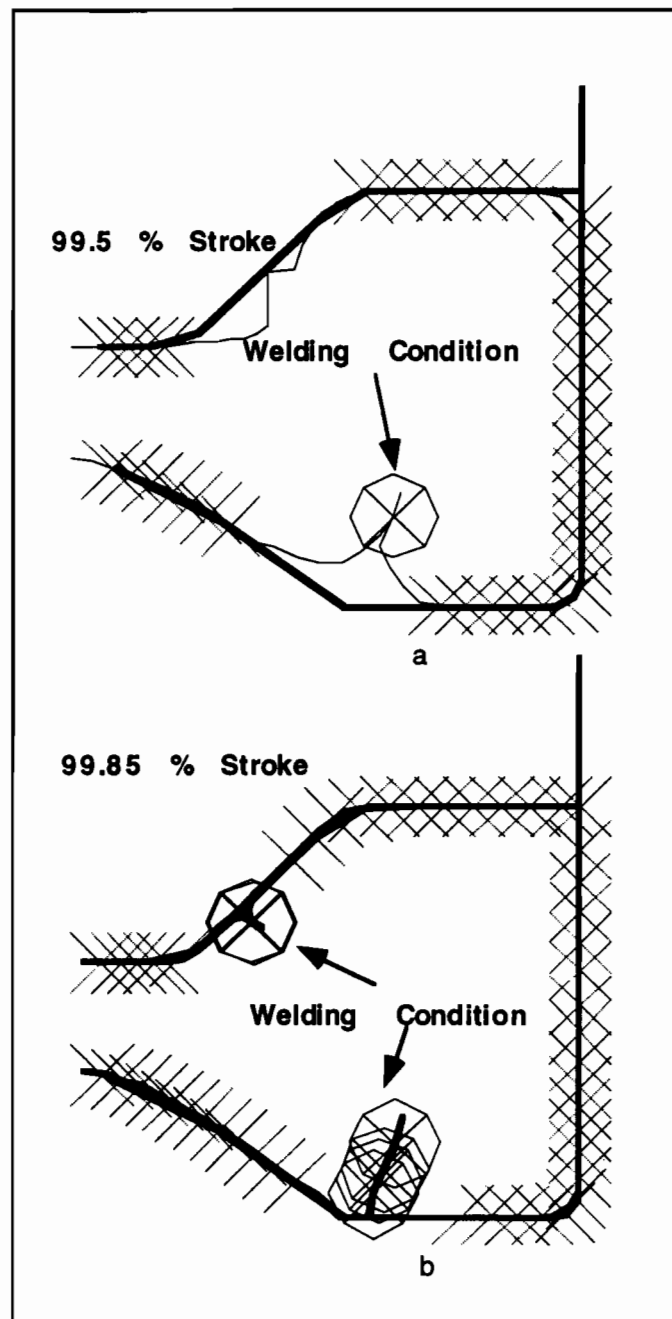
Welding condition at the beginning (99.5 % stroke) and at the end (99.85 % stroke) of the rewelding process for Disk 2 case with 3.6 mm final thickness
